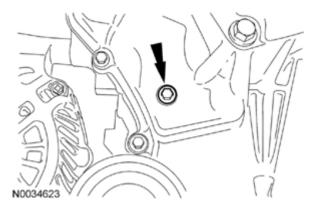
Locating Front Cover Upper Timing Hole Plug Courtesy of FORD MOTOR CO.
